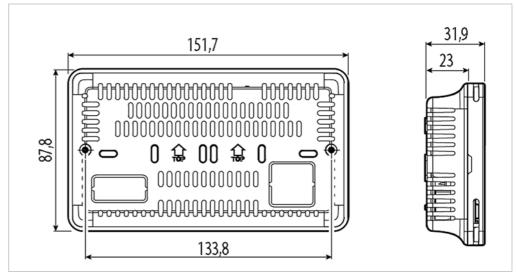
Front and side view ISYteq Touch 4.0 OC (dimensions in mm)
